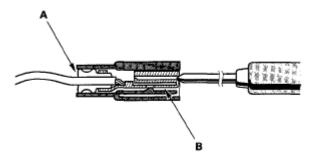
Identifying Sealed And Terminals Courtesy of AMERICAN HONDA MOTOR CO., INC.
